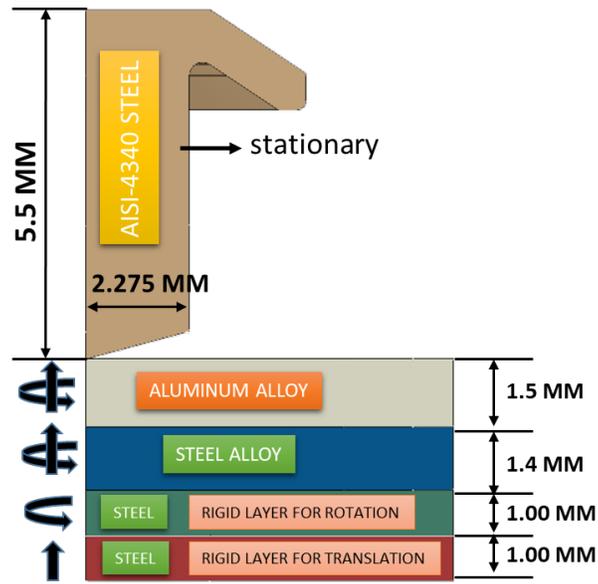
CROSS-SECTION OF FEM SET-UP WITH DIMENSIONS OF DIFFERENT PARTS
